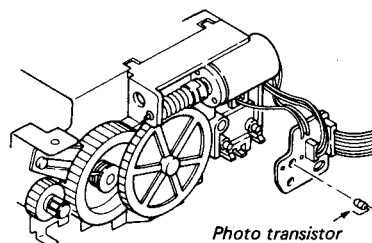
Replacement photo transistor on FL P.C. board (R)
